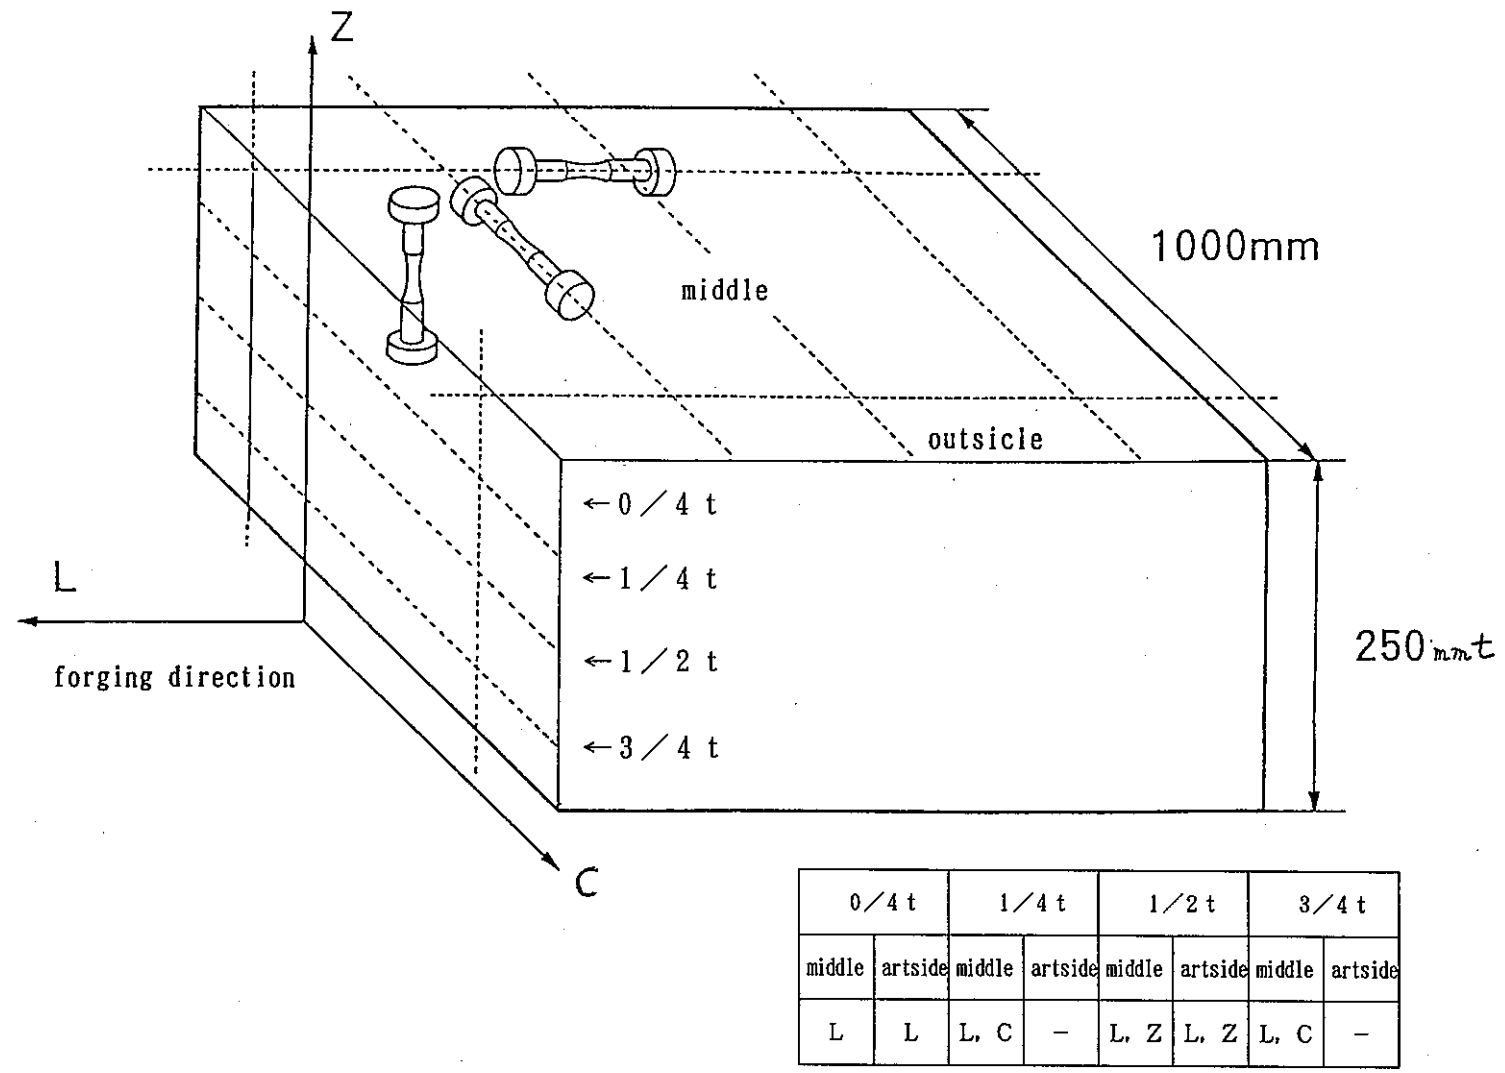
Sampling method of fatigue test specimen of Mod.9Cr-1Mo steel forging
